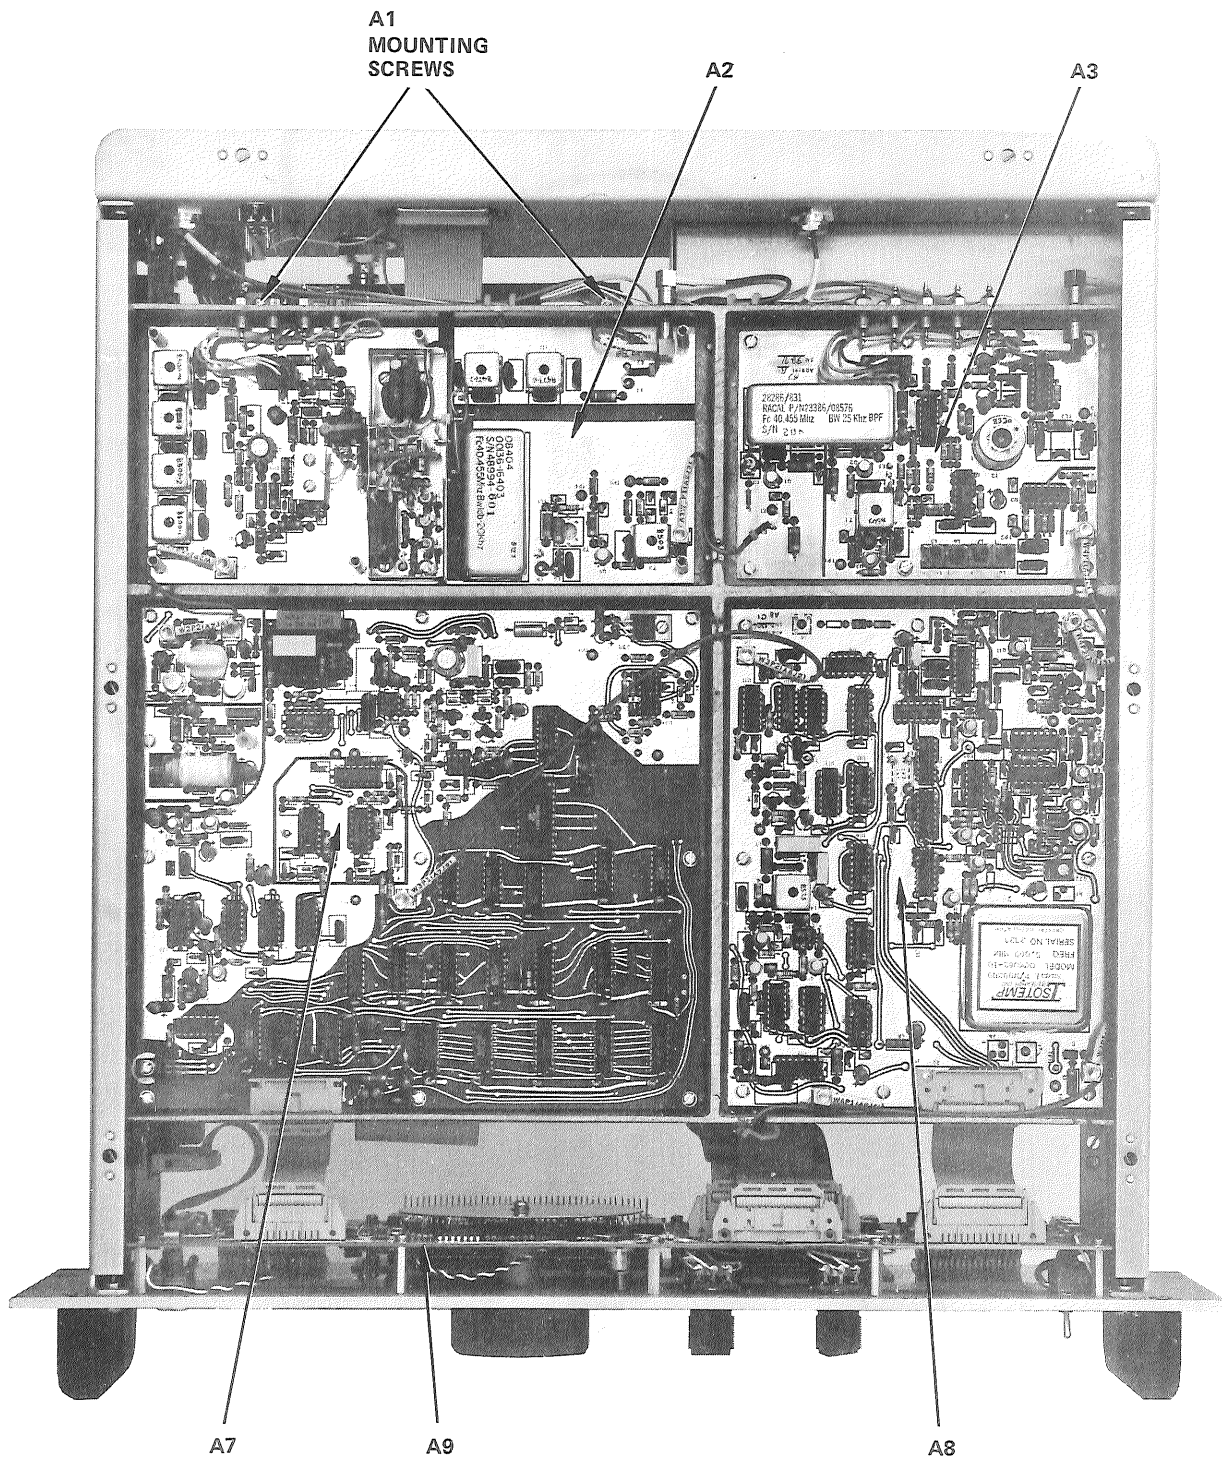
Receiver R-2174 (P) URR, Bottom View, Cover Removed
